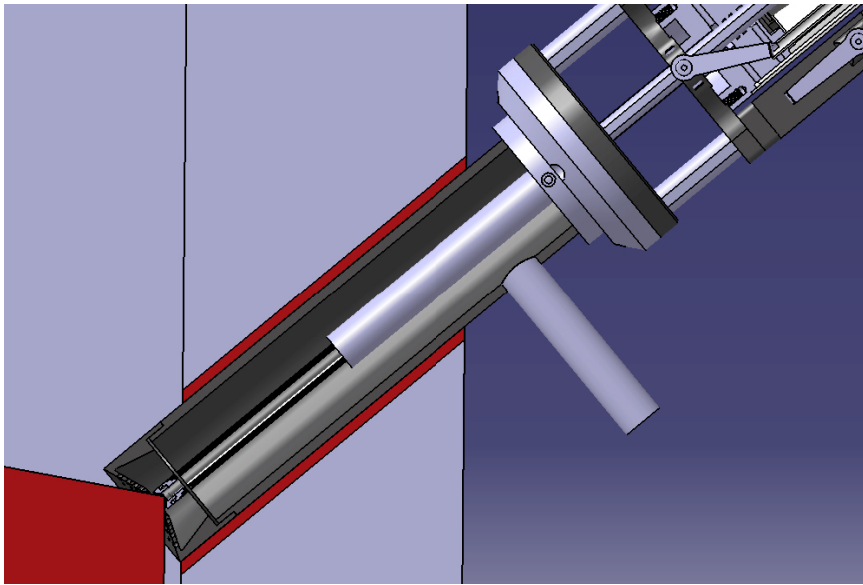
Drawing of guide and camera tubes with "shower head" mounted in the boiler wall. The read cone illustrates the field of view of the camera.
